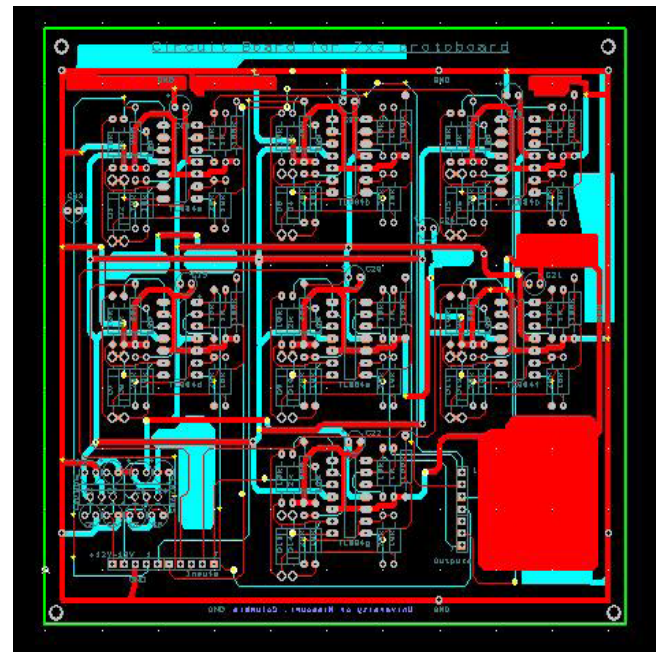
Printed Circuit Board layout for seven sensors in the 7x3 prototype board. This is a two layered board, the top layer is indicated by red color and the blue color indicates bottom layer. Three such Printed Circuit Boards were developed for the complete prototype board.
